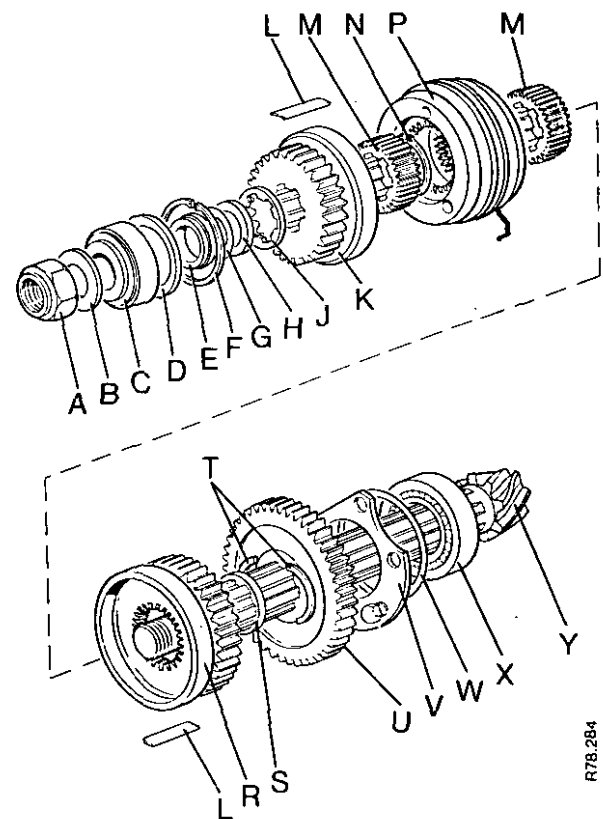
BEVEL PINION SHAFT ASSEMBLY
